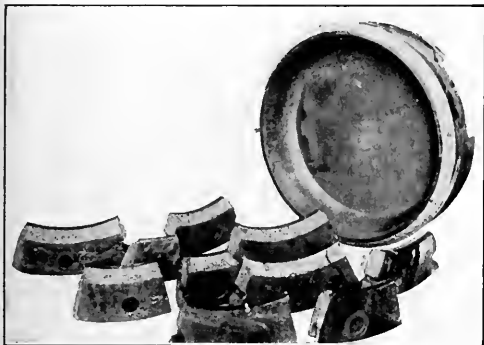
CYLINDER HEAD AND PIECES OF THE FLANGE
